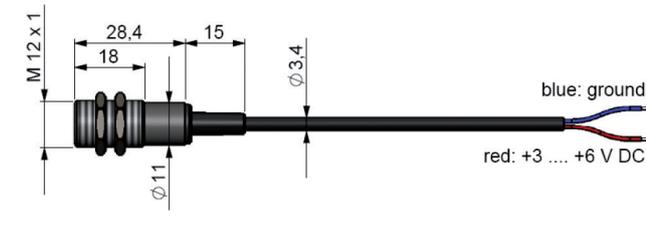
OEM laser sighting tool [TM-LSTOEM-CT]
